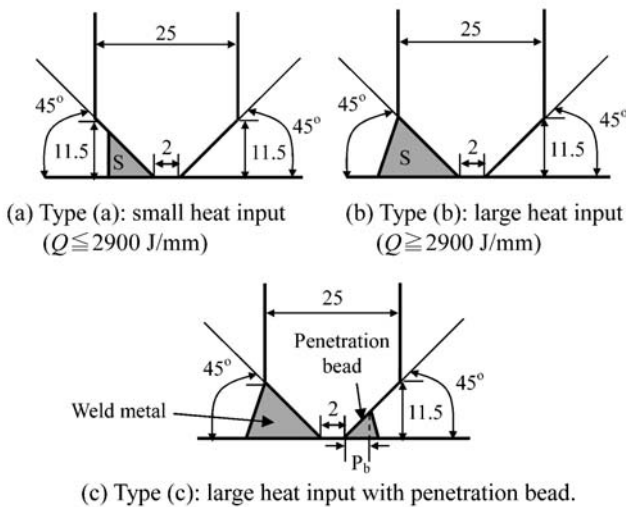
Schematic illustrations of weld metal and penetration bead.
